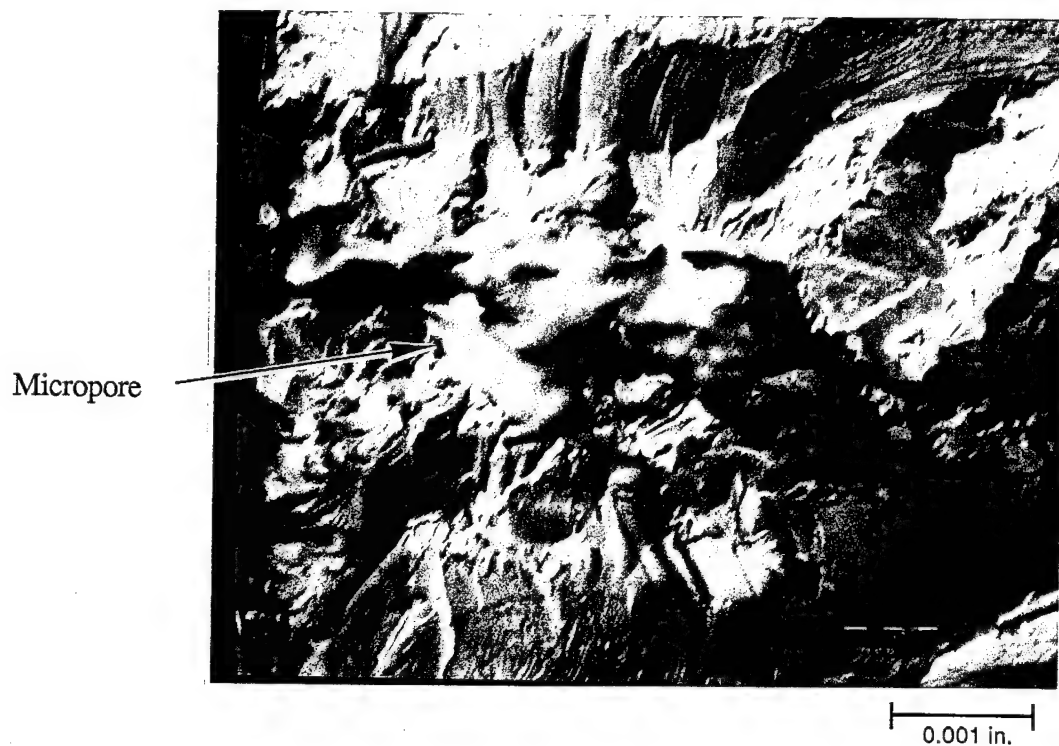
Fatigue initiation in open hole specimen from a pore in *old material*, micropore size = 0.011 in.
